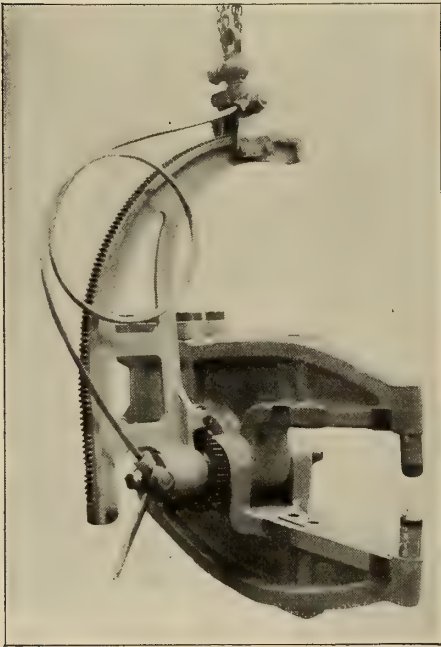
A SPECIAL BOILER RIVETER MADE BY MESSRS. MUSGRAVE BROS., LEEDS, ENGLAND.
